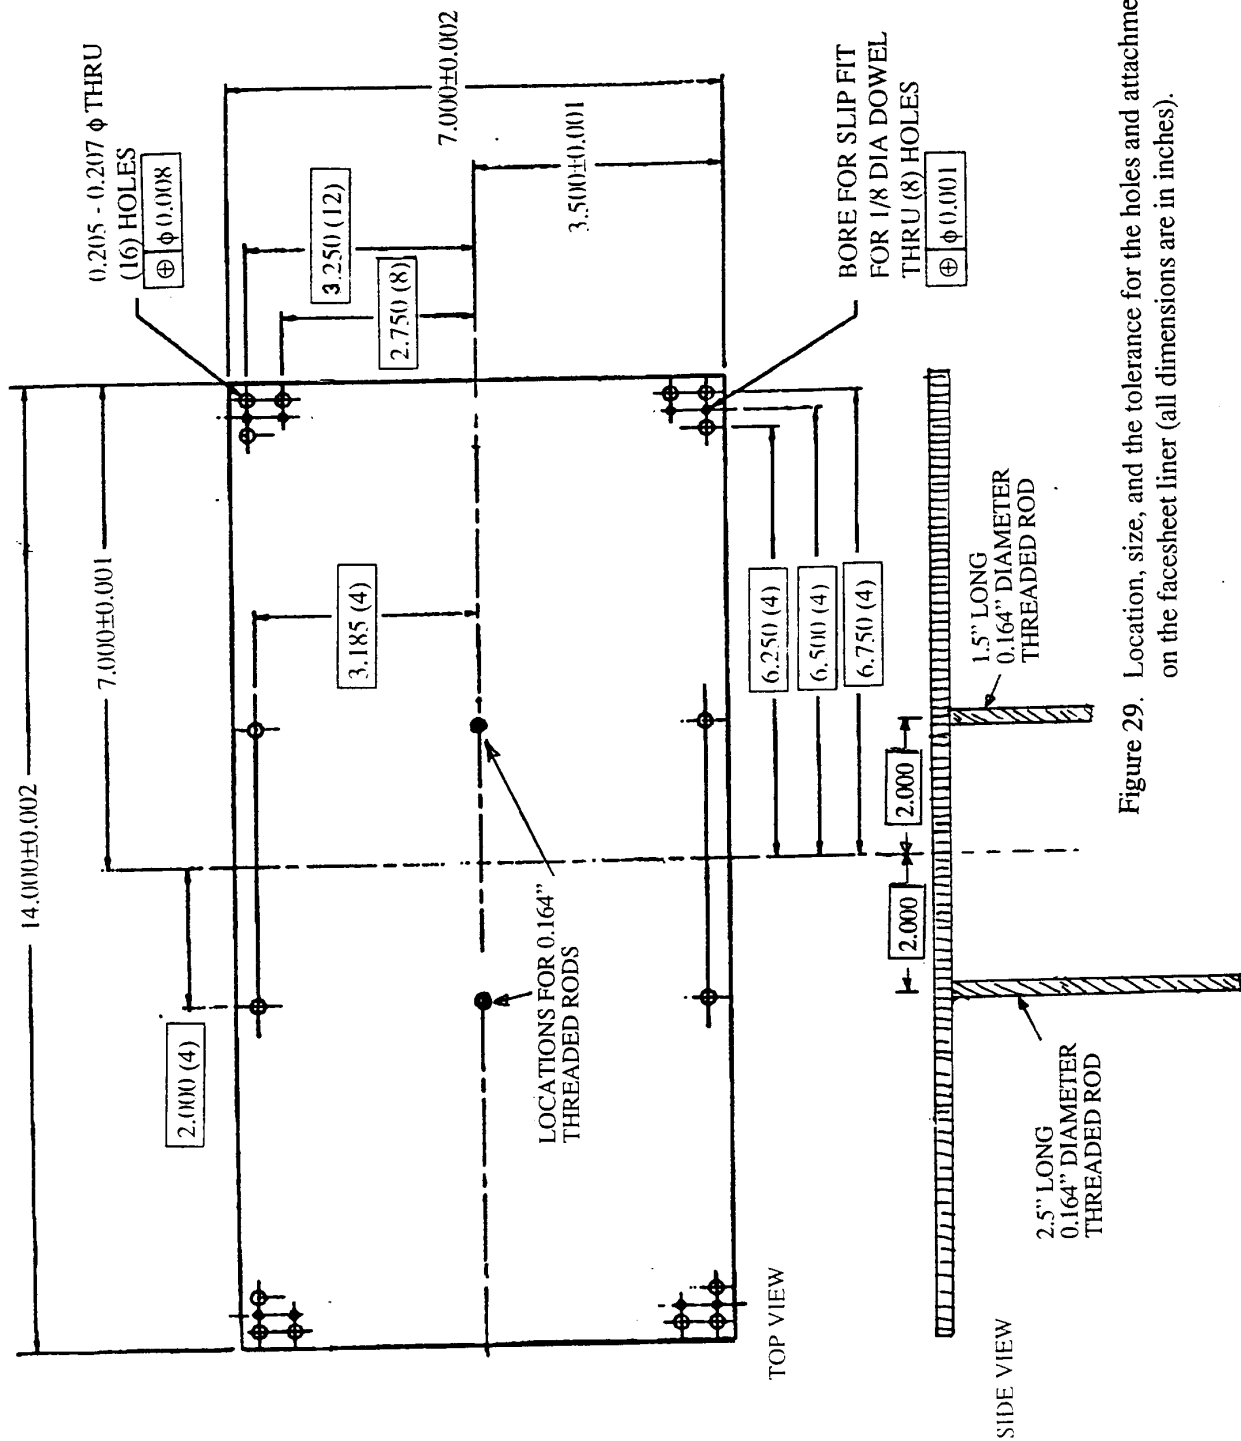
Location, size, and the tolerance for the holes and attachment rods on the facesheet liner (all dimensions are in inches).
